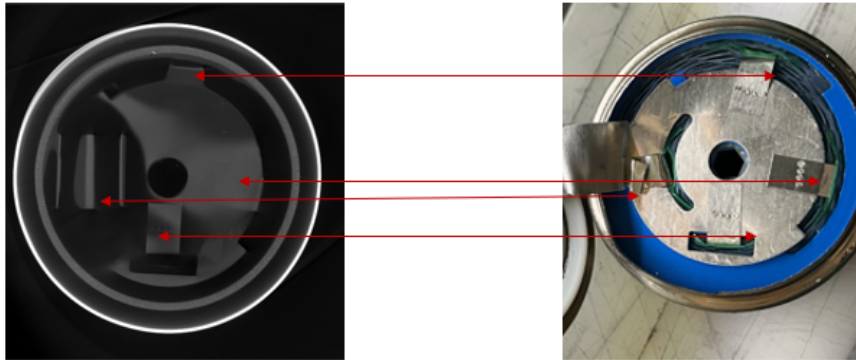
Exploded view from top depicting the isolation spacer, metal tabs and laser welds
